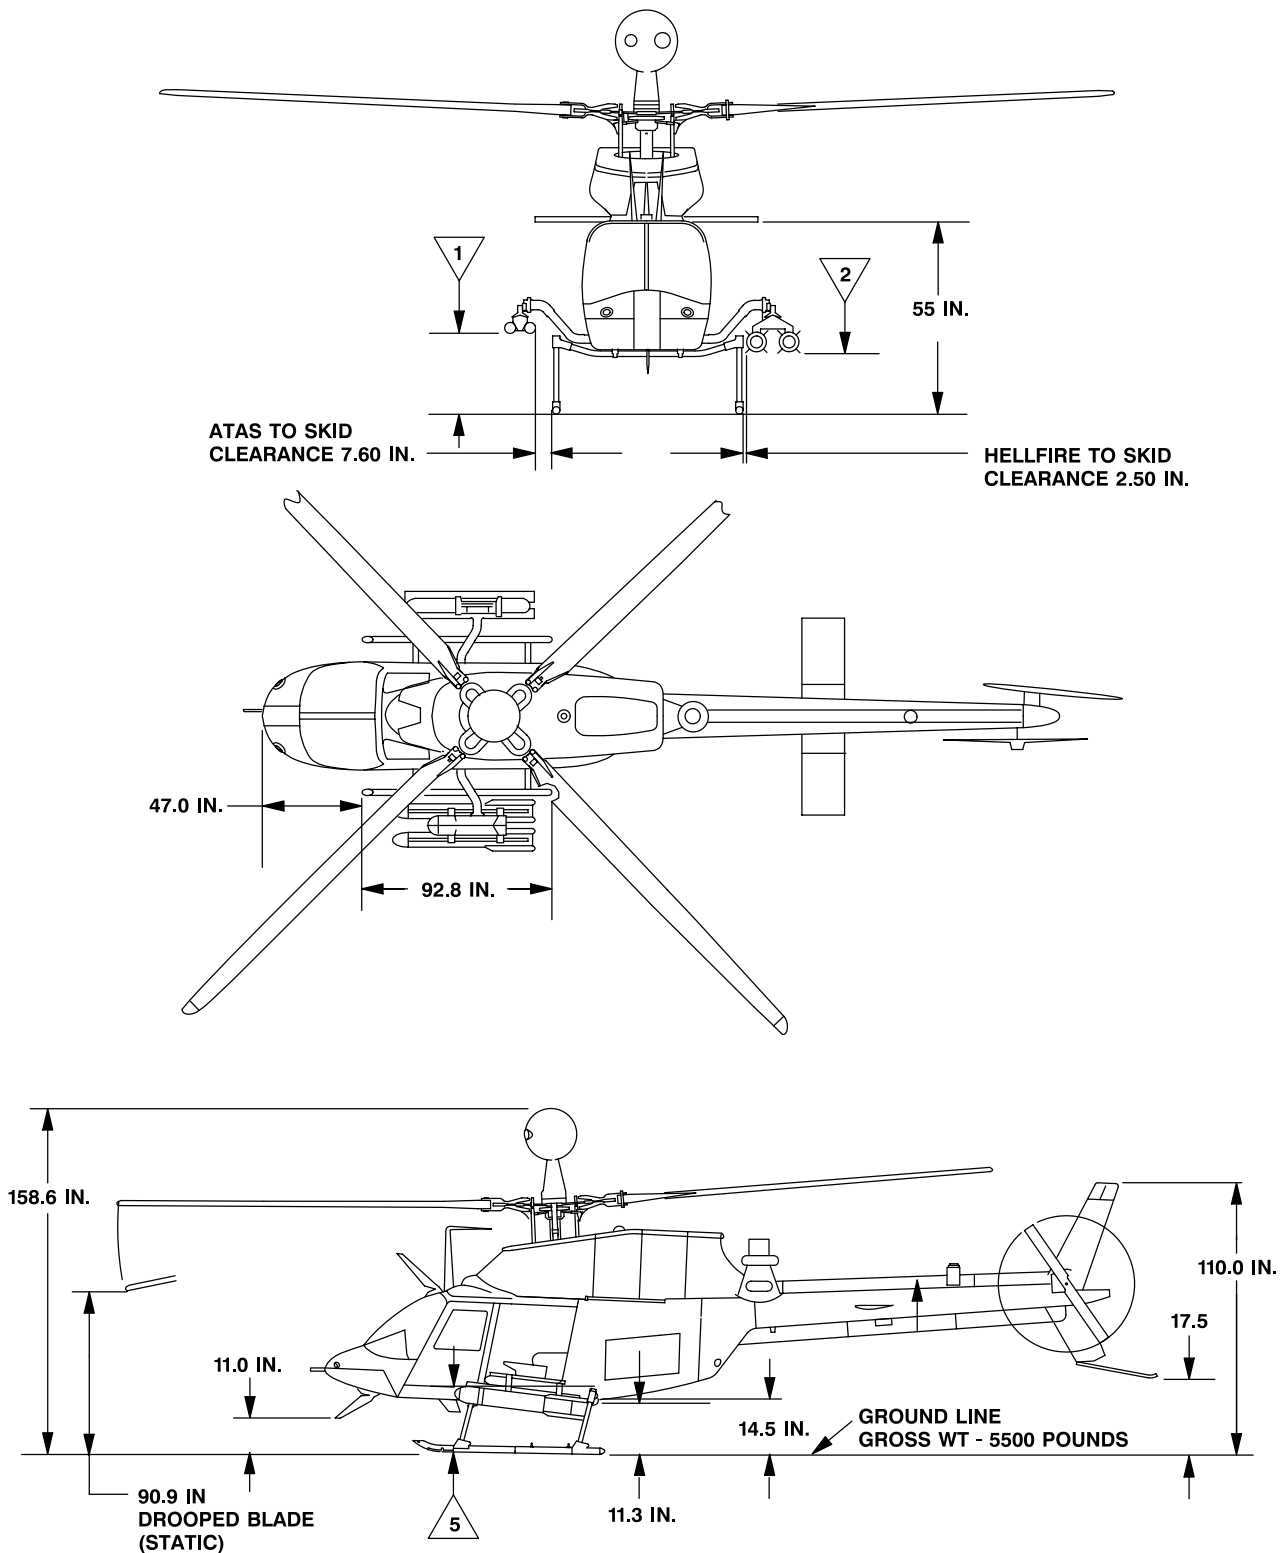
Principal Dimensions and Ground Clearance (Sheet 1 of 4)
